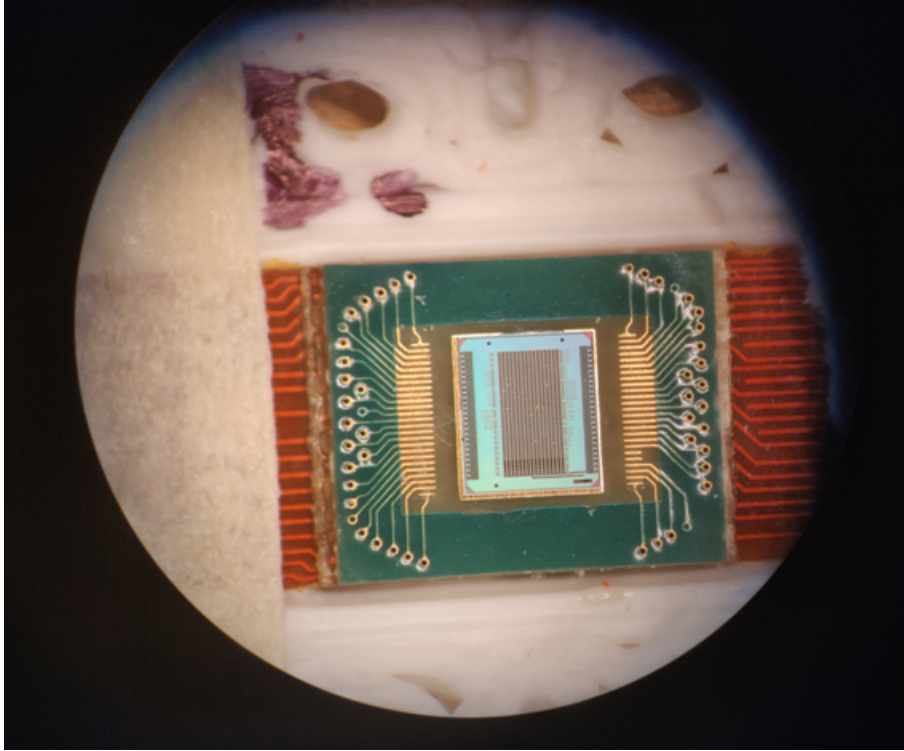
Microscope view of the front APiX chip microbonded on the flat PCB cable.
